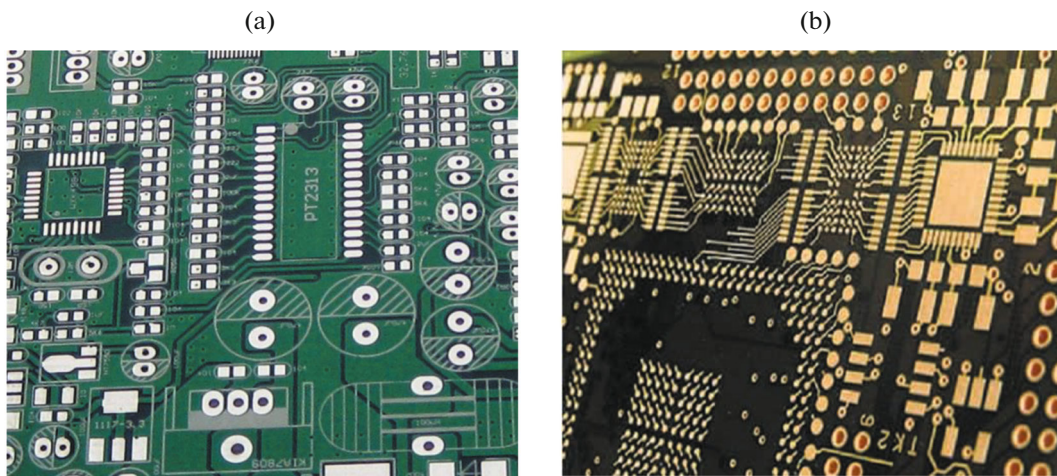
Boards with (a) an immersion silver coating and (b) ENIG.
